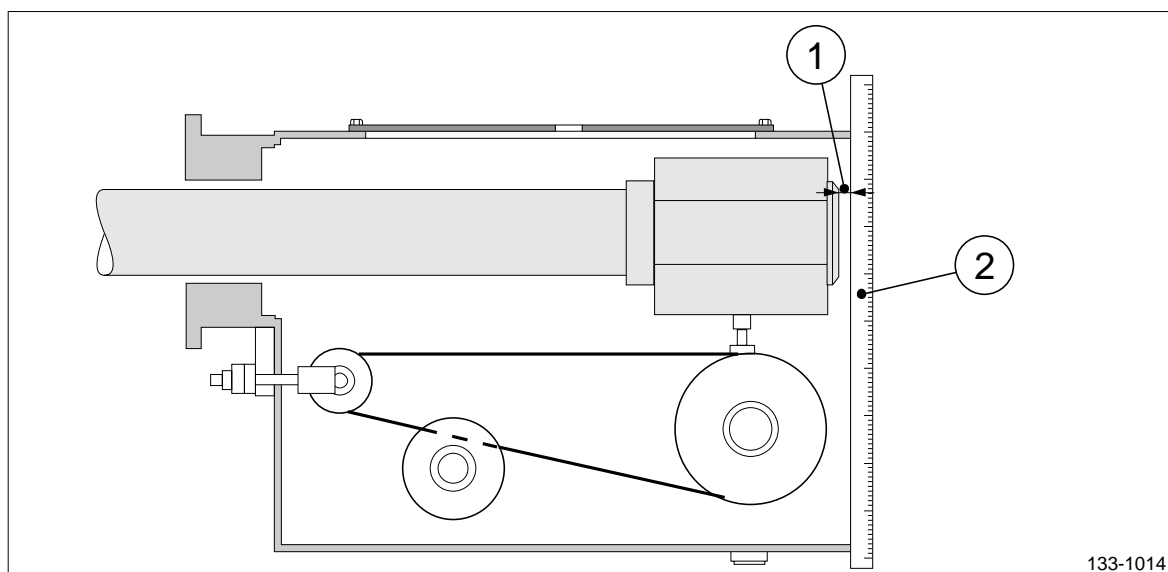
Position of the OD-box ring in mechanical end position ahead.
